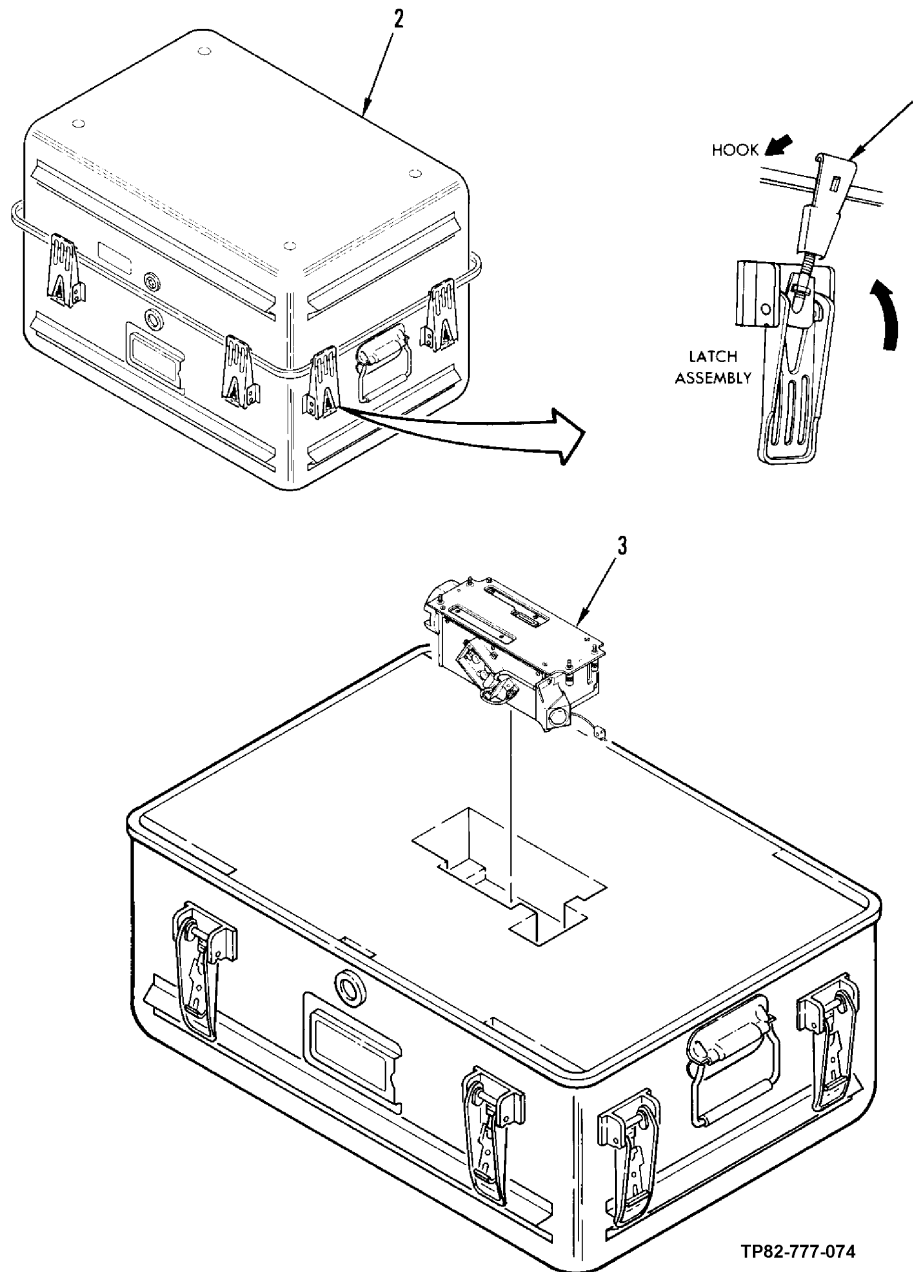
Television Sensor Assembly or Solid State Camera Installation into Shipping and Storage Container
